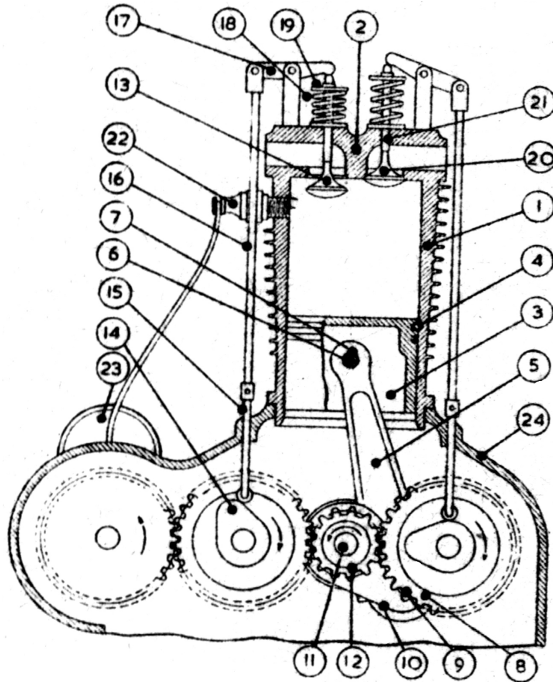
A Four-Stroke Internal Combustion Engine:
